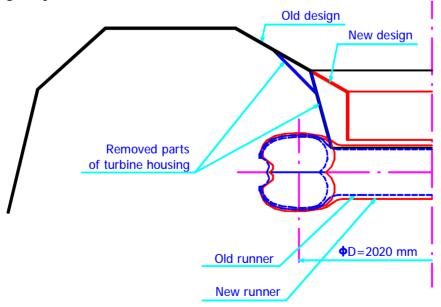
Turbine housing modifications and Pelton runner dimensions
